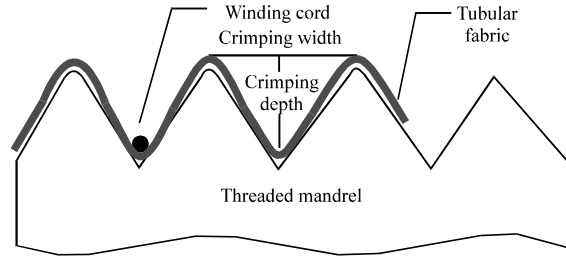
Configuration of threaded mandrel and tubular fabric (axial section)
